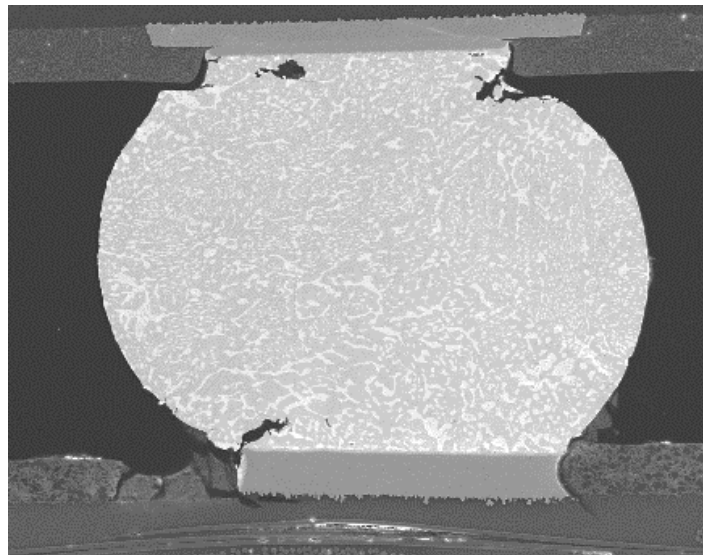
Simultaneous Crack Propagation Top and Bottom of the Solder Joint, 16 mm C2 BGA
